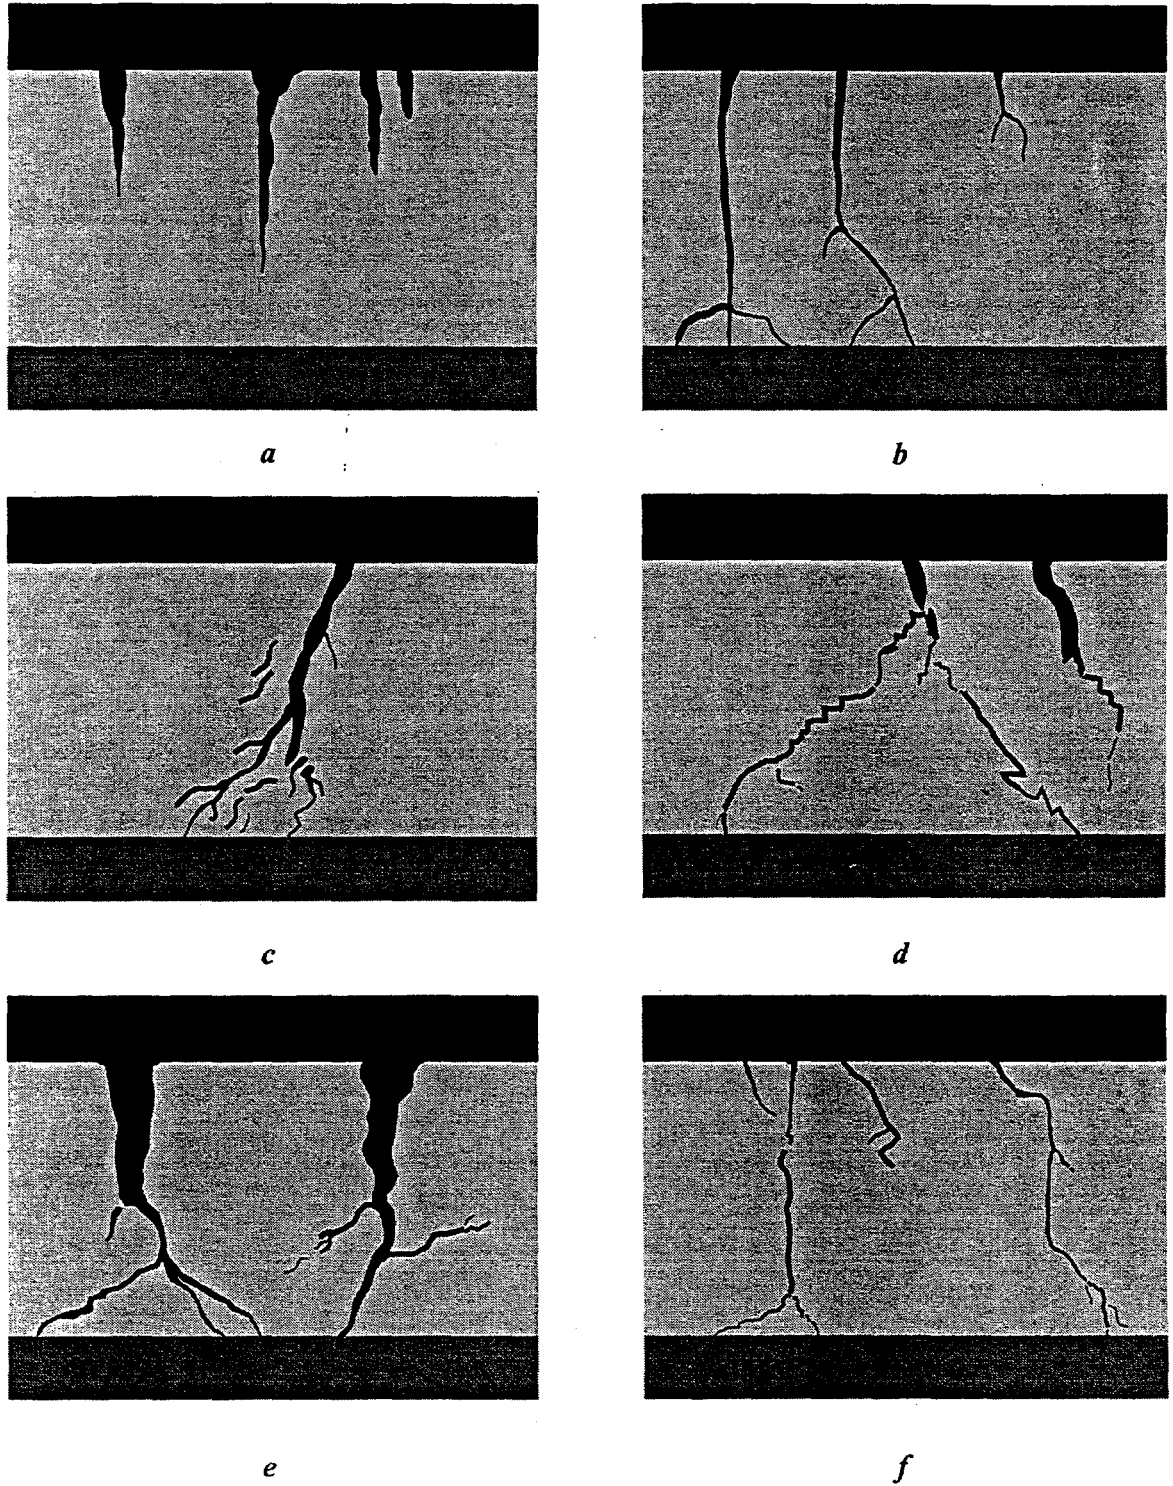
Schematic drawing showing the various types of crack morphology found in coextruded tubes as cracks propagate to the interface between the carbon steel and the stainless steel.
